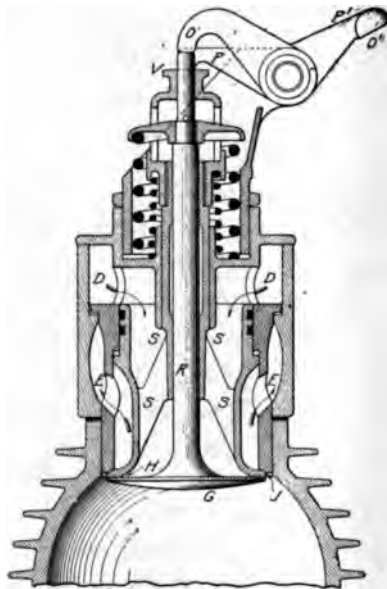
Combined Inlet and Exhaust Valve of Pipe Motor
